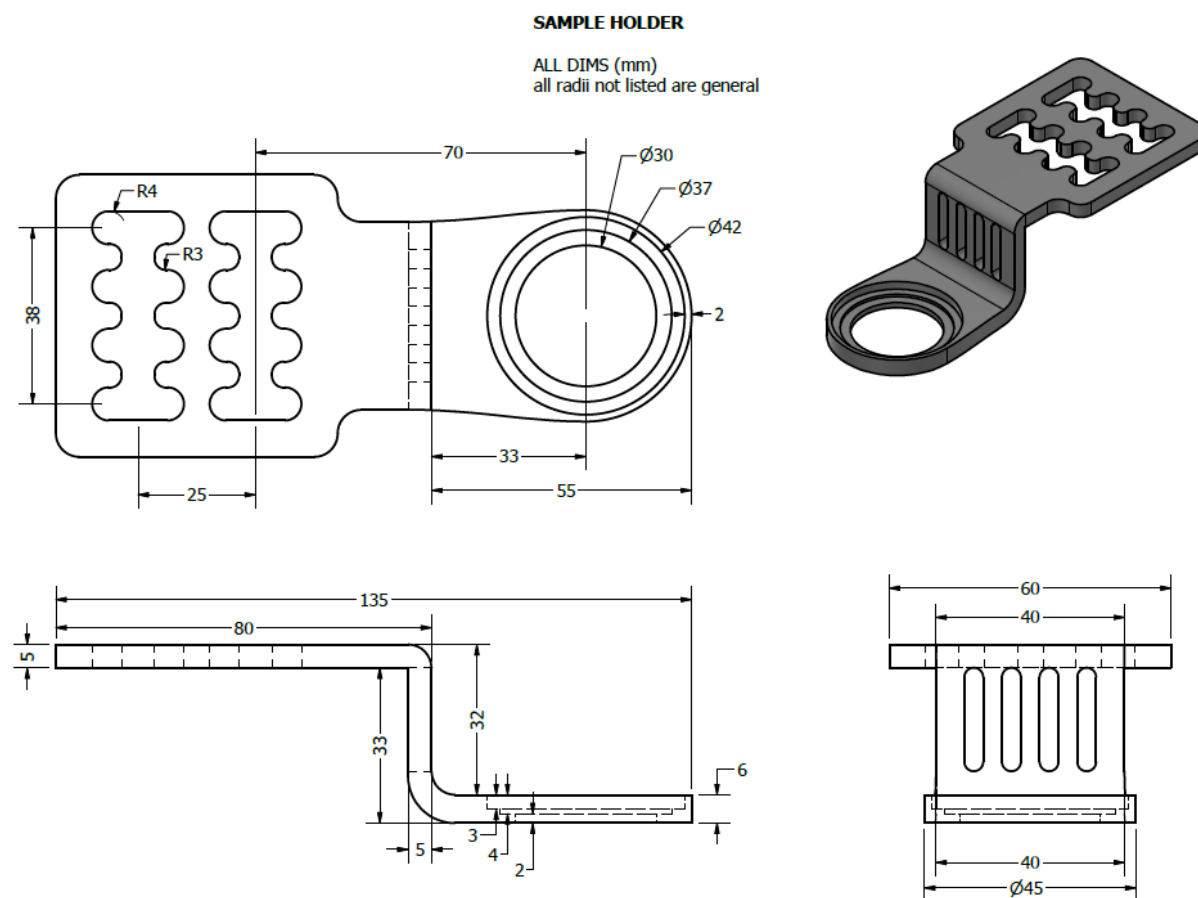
sample holder part drawings. Unlisted dimensions are open for customization
